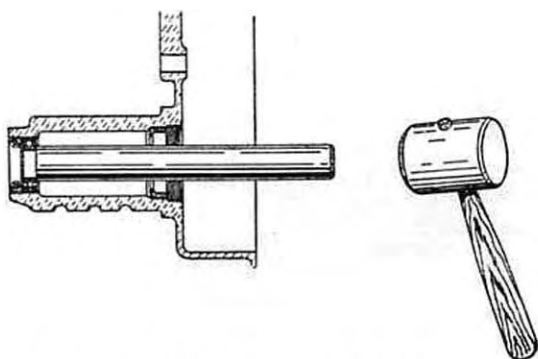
Removing Rear Wheel Ball-Bearing.
